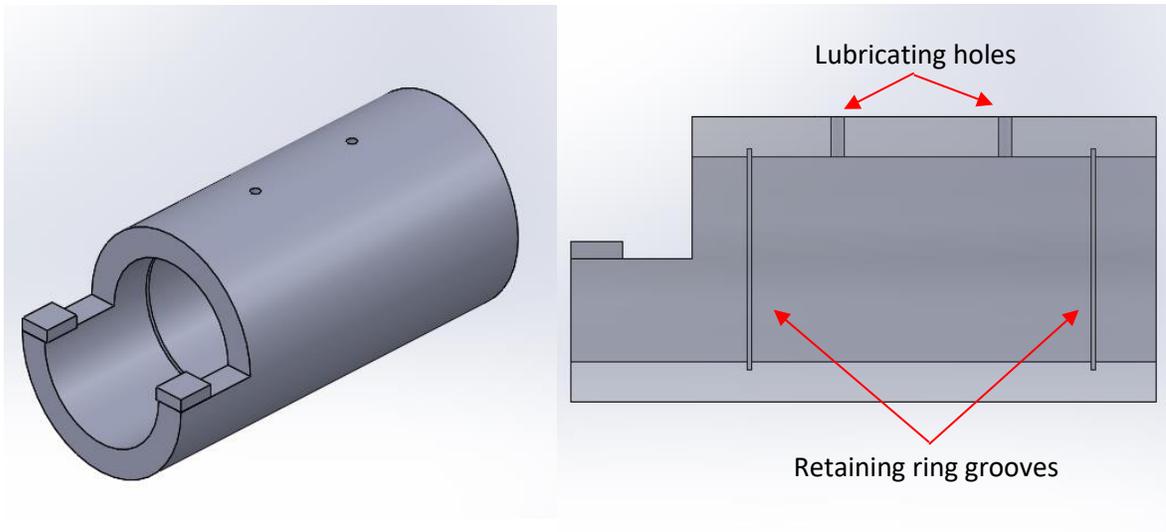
Hollow Tube in Final Idle End Design, Shaft Housing
